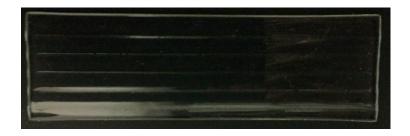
Improvement step 1 using SFG-2TM mold in a kiln
